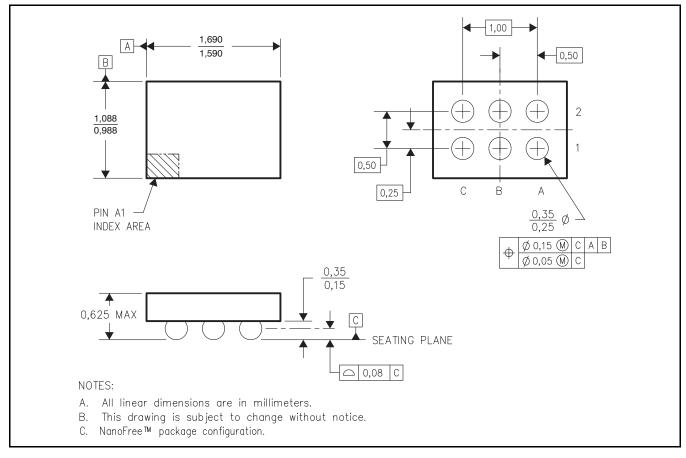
YZC Wafer Chip-Scale Package Dimensions (in mm)
